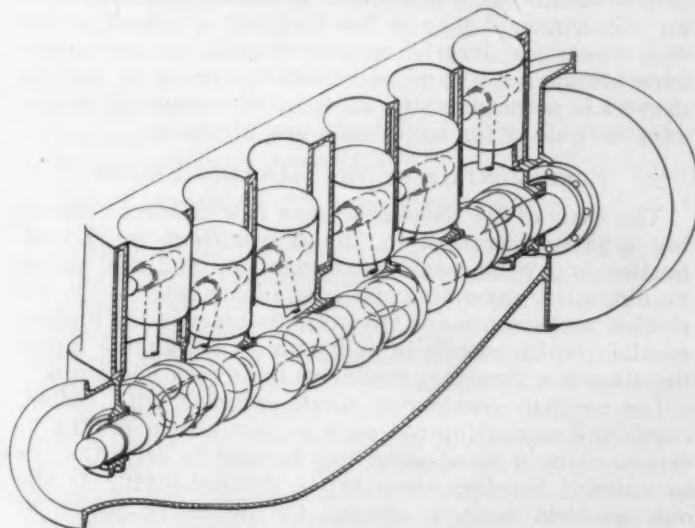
SIX-CYLINDER SEVEN-BEARING ENGINE
